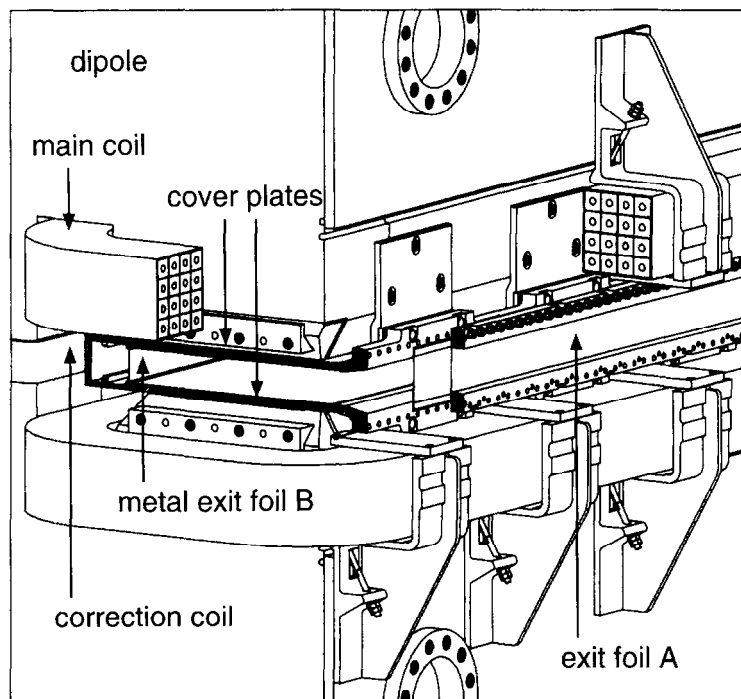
Mounting of the COSY-11 vacuum chamber inside the dipole gap.
